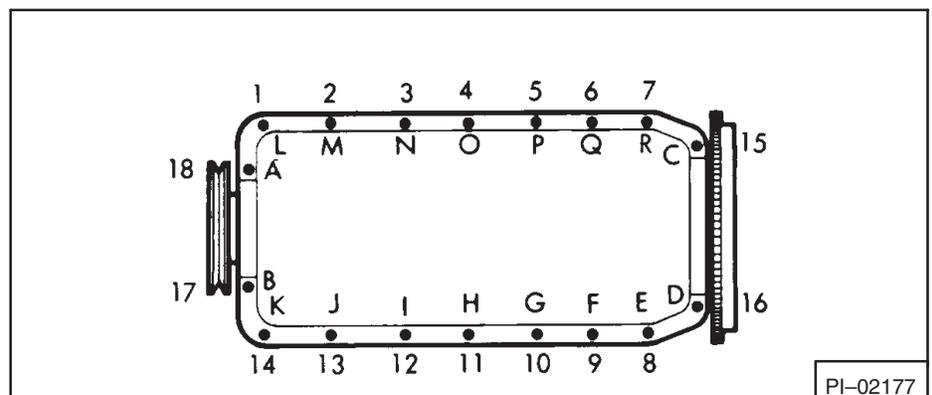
B-55 Tightening Sequence For Oil Pan Bolts
